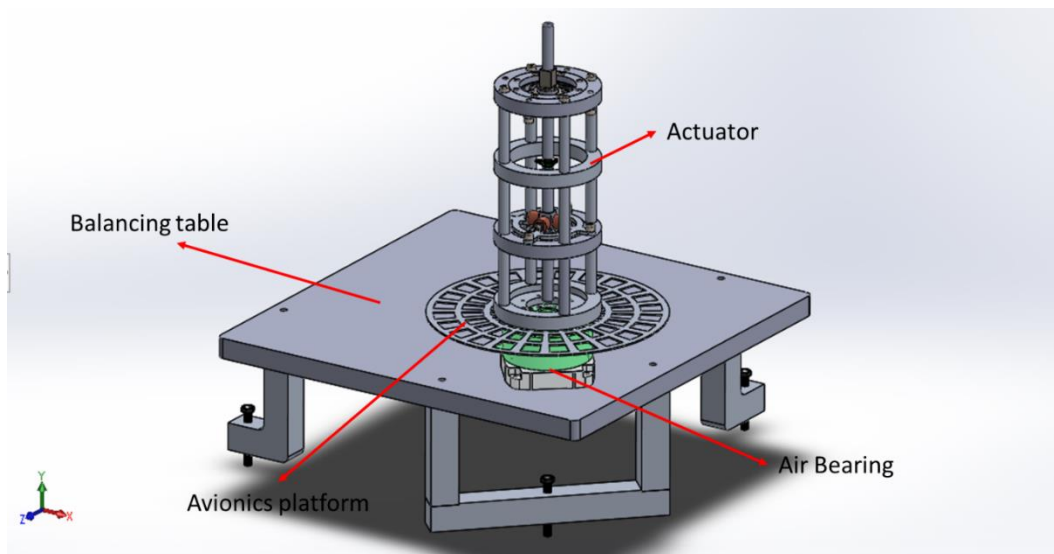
Mechanical design of experiment setup for slender rotor geometry
